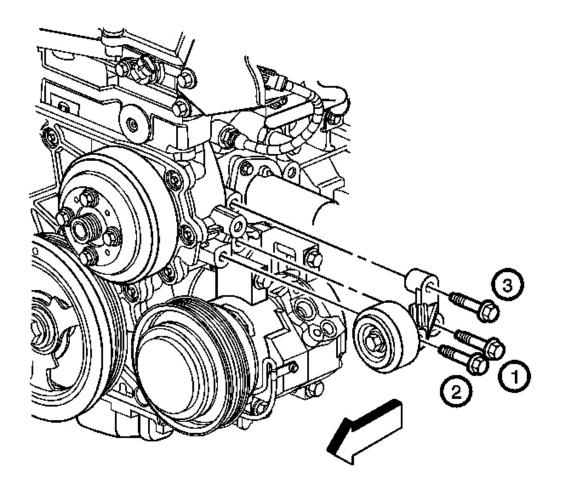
View Of Drive Belt Idler Pulley & Bolts Courtesy of GENERAL MOTORS CORP.
